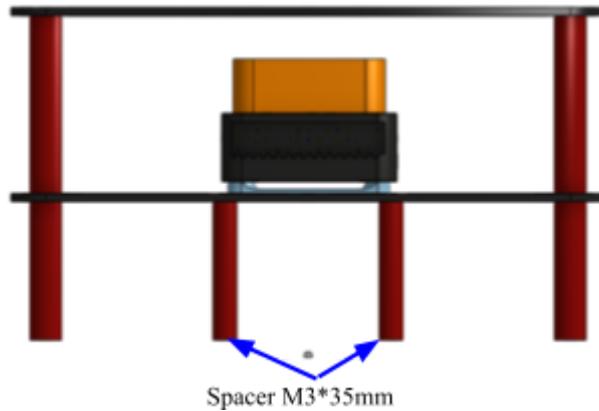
assembled view of 4 spacers on the middle bottom side of middle plate
